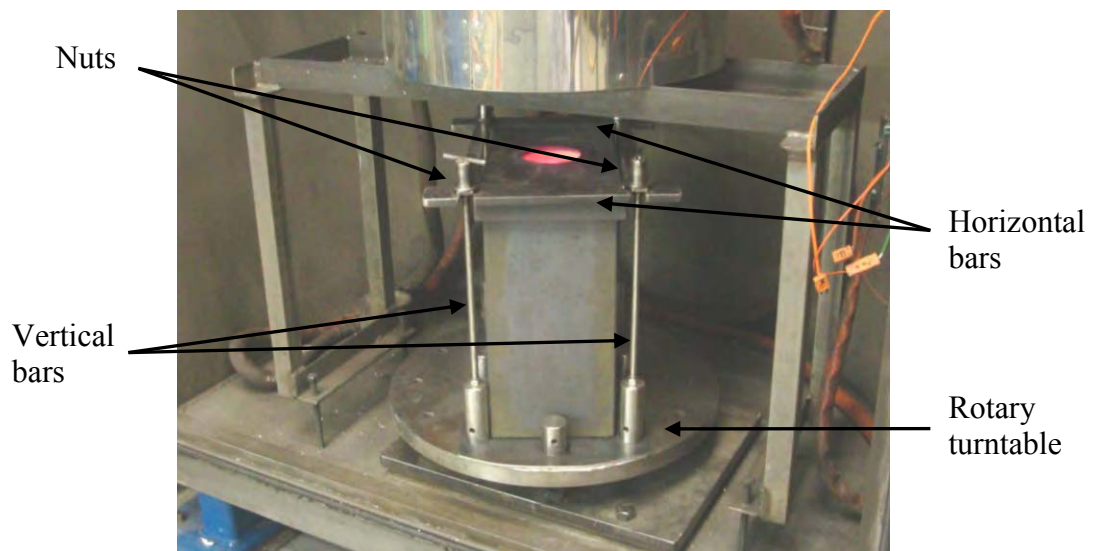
8. Clamping system to attach Inconel box to centrifugal casting table.
